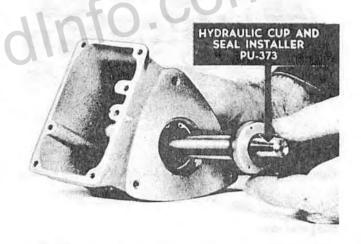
Lip of Seal Must Be Toward Hydraulic Cylinder
